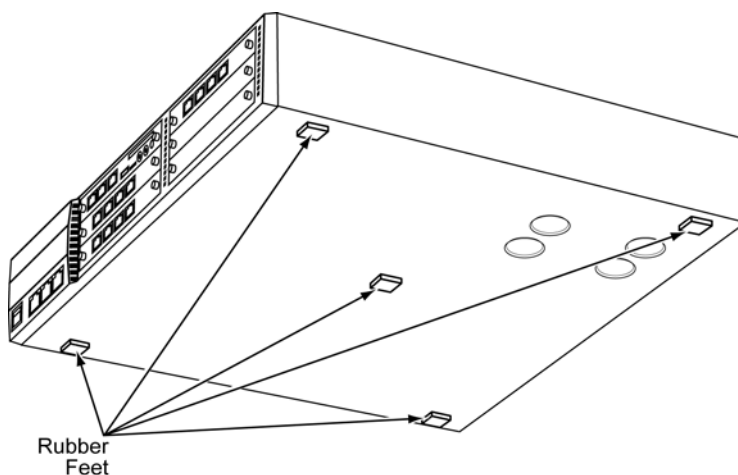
Attach Rubber Feet to CHS2U-US Chassis
